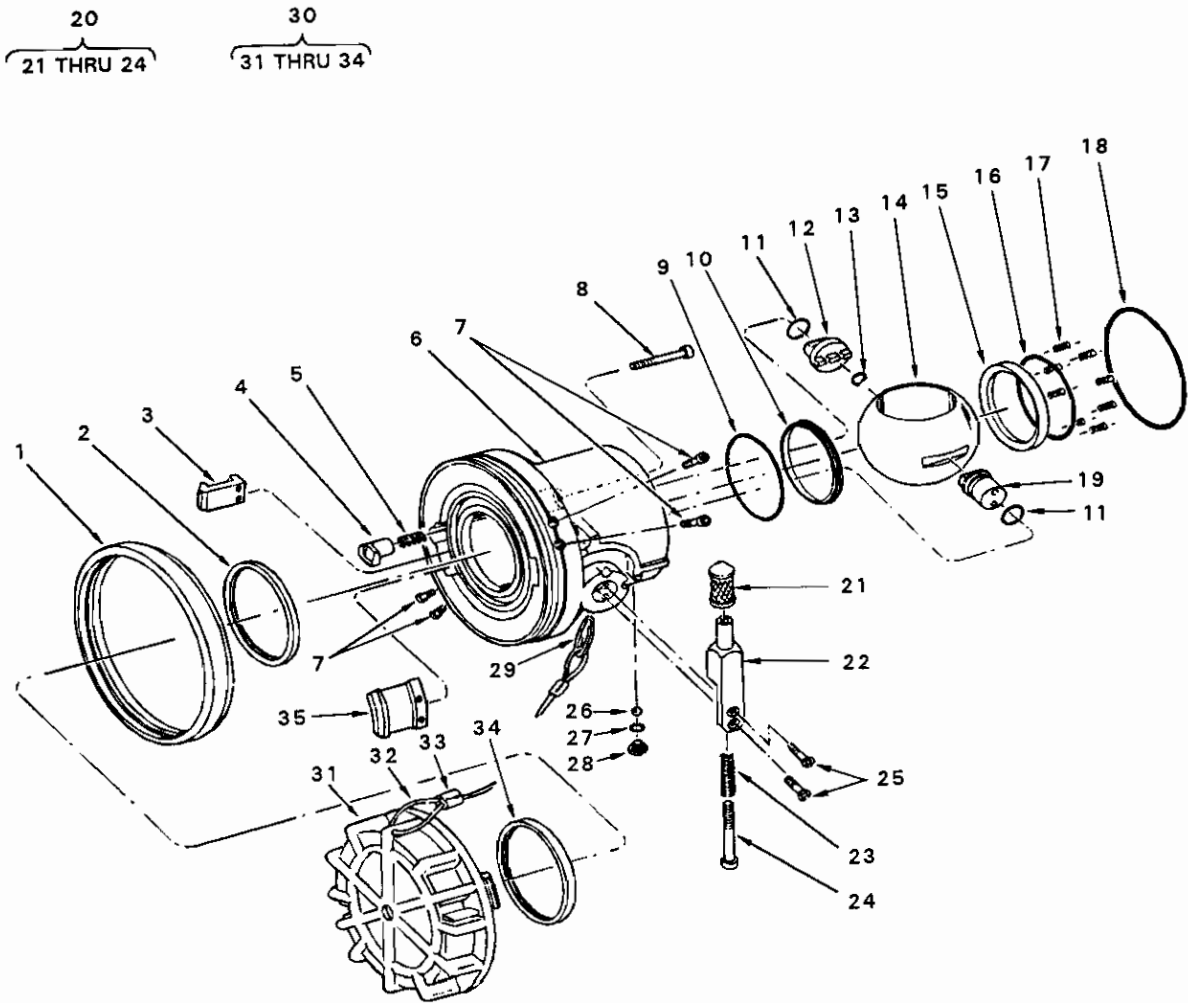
Coupling, Unisex, 2-Inch, Valved
